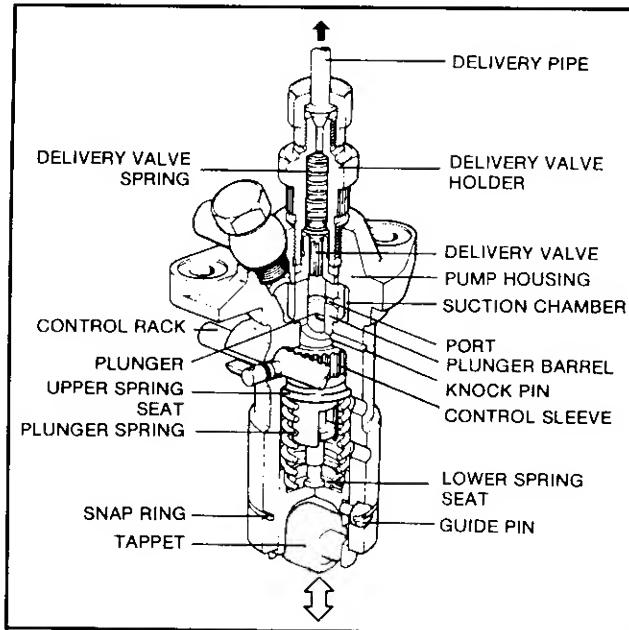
SINGLE INJECTION PUMP ASSEMBLY
